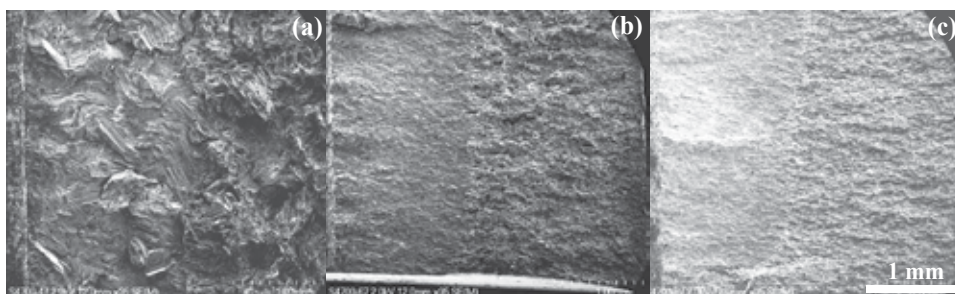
Fracture surface by crack propagation with 3 point bending test (a) : cast material, (b) : MAFed material of 1 cycle with 50% roll working, (c) : MAFed material of 3 cycle with 50% roll working
